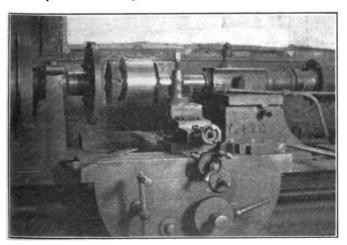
Air-Operated Arbor for Holding Rod Bushings in Engine Lathe
